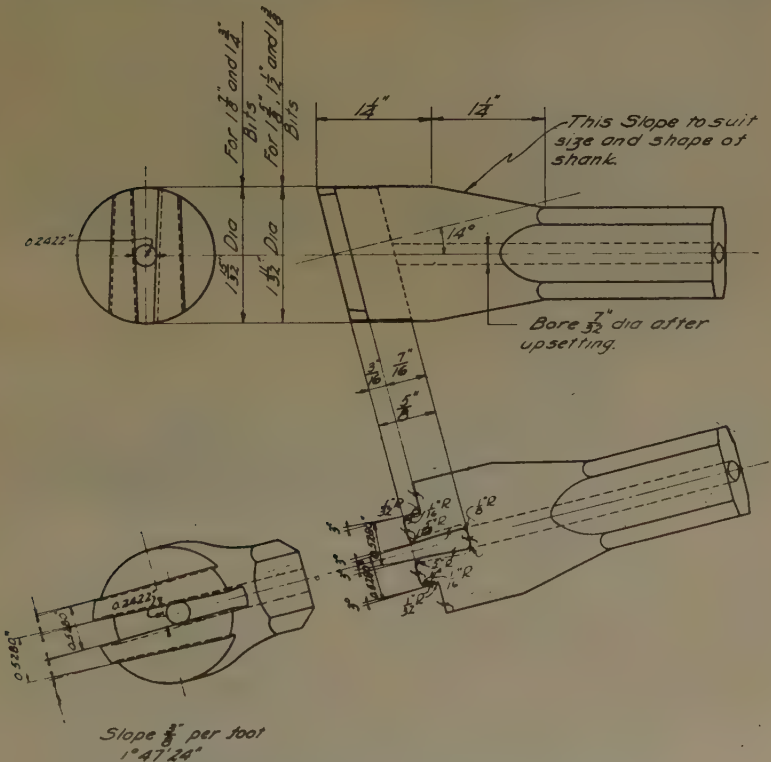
MILLED BIT END OF HOLLOW DRILL SHANKS.
